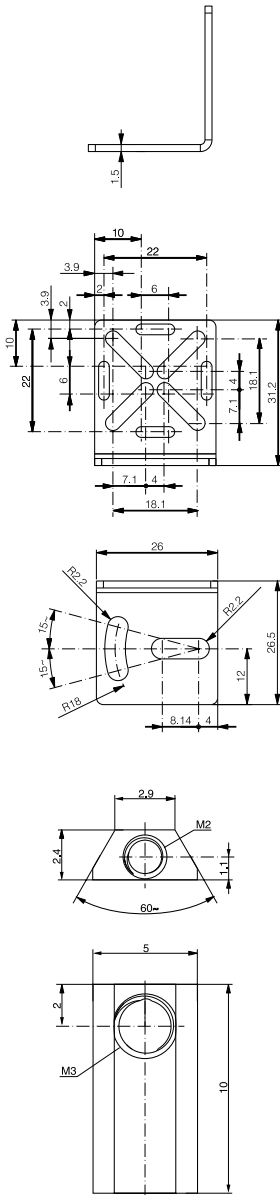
TOP AND BOTTOM OPTIONAL MOUNTING BRACKET No. 7 (REF: YXW-0007-000)
